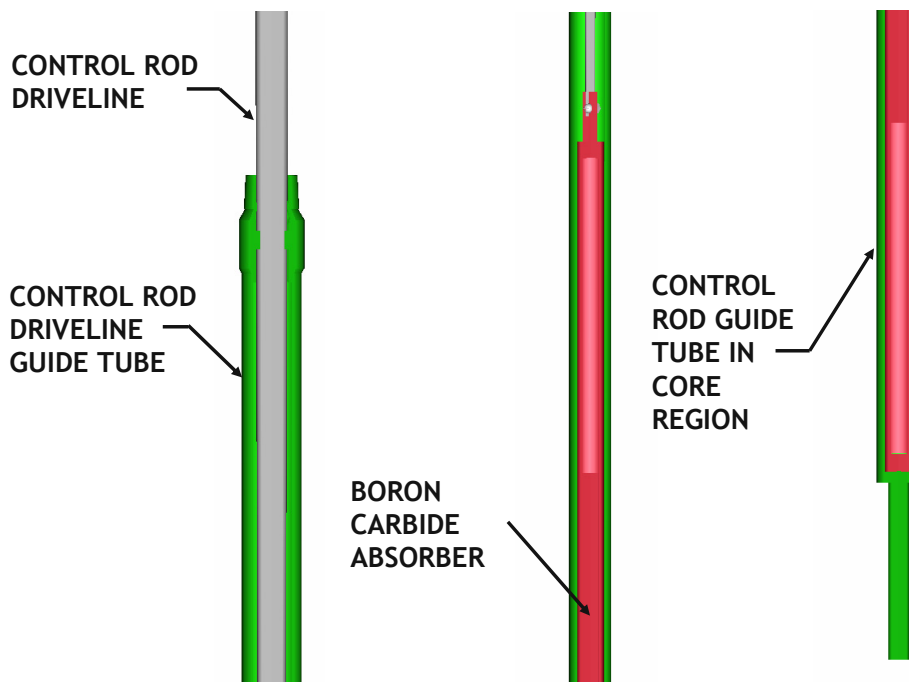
SSTAR control rod, control rod driveline, and control rod driveline guide tube.
